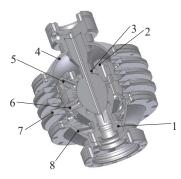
Design embodiment of an adjustable ball hydrostatic support unit: 1 — fixed casing; 2 — lid; 3 — ball; 4 — upper housing; 5, 6 — fittings; 7 — metal bellow; 8 — bottom housing
